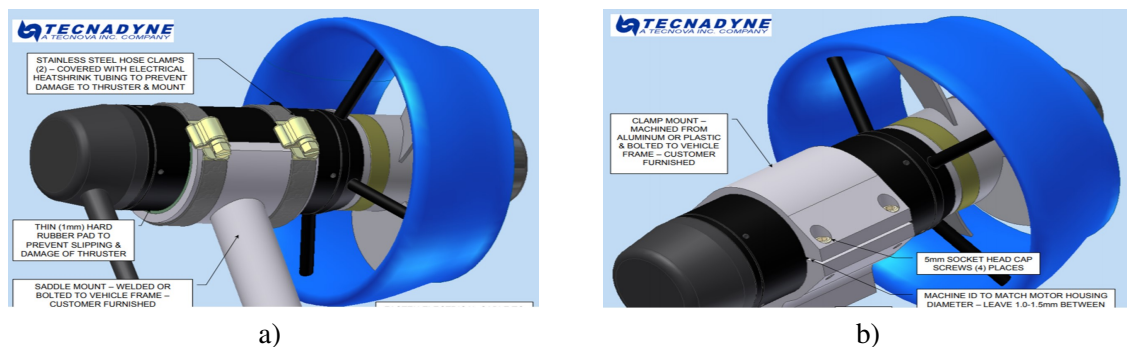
Mountings proposed in the guide with a) stainless steel hose clamps b) clamp mount [48].
